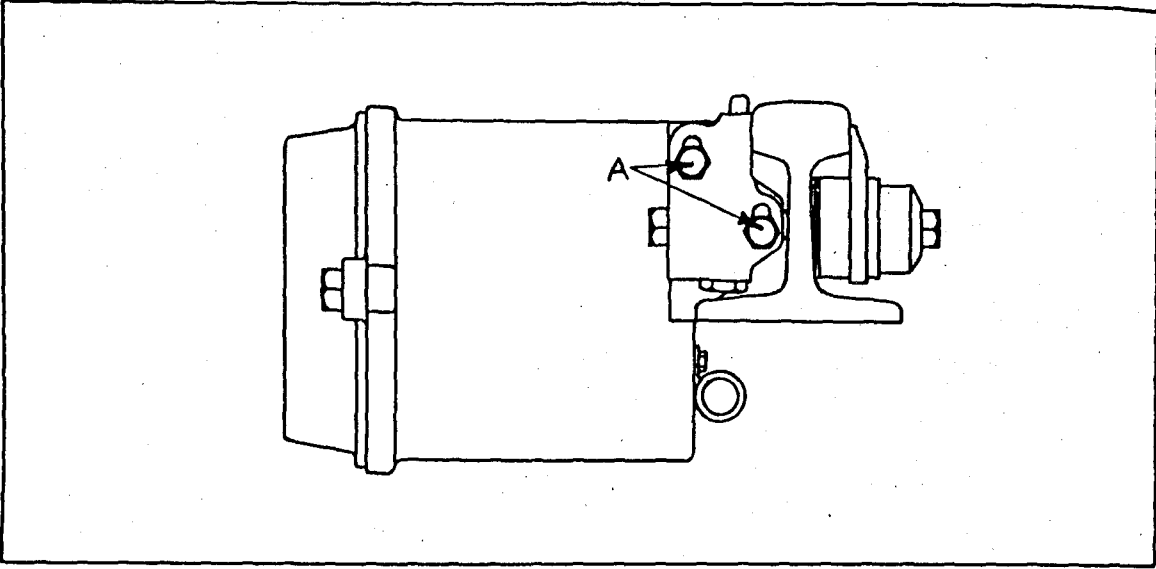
P&M. TRACK LUBRICATOR SHOWING PUMP ASSEMBLY .
